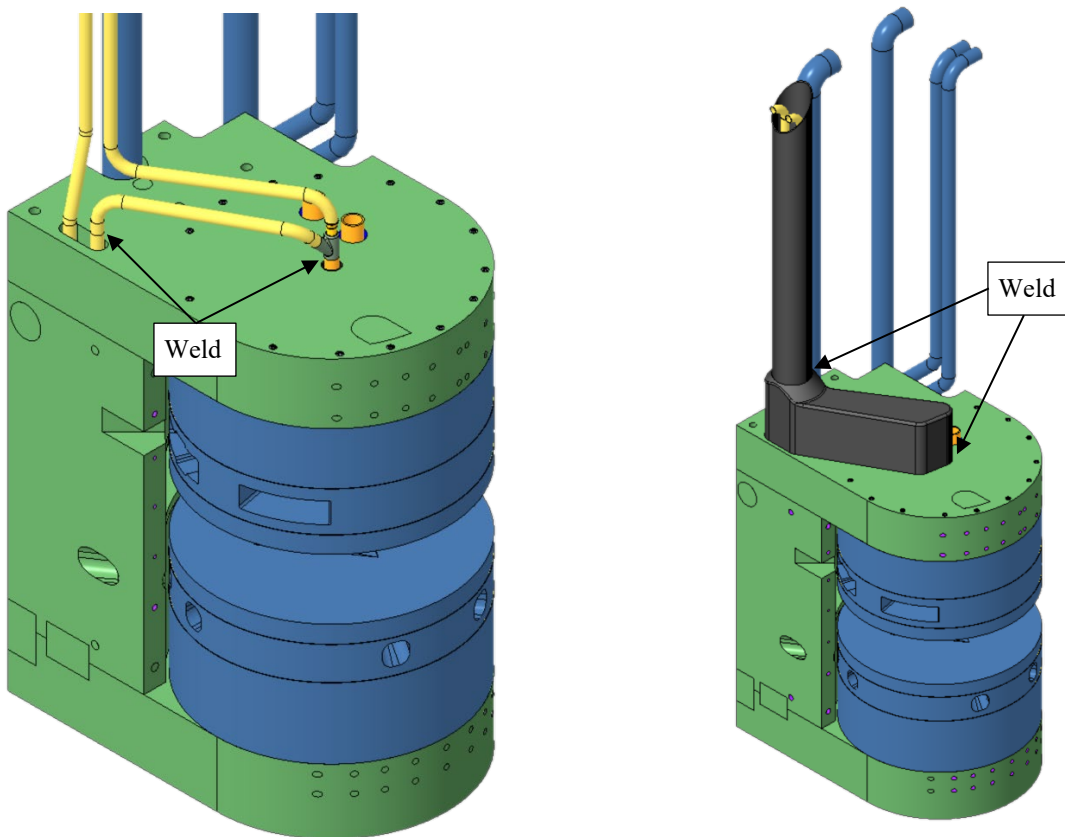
Upper hydrogen line welding (left) and upper vacuum cap and tube welding (right).
